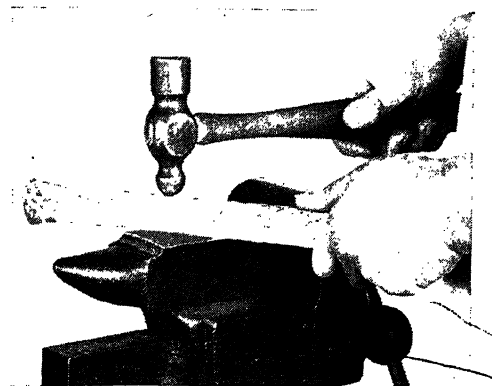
Marking the surfaces of a metal bar. Note that the end is formed
